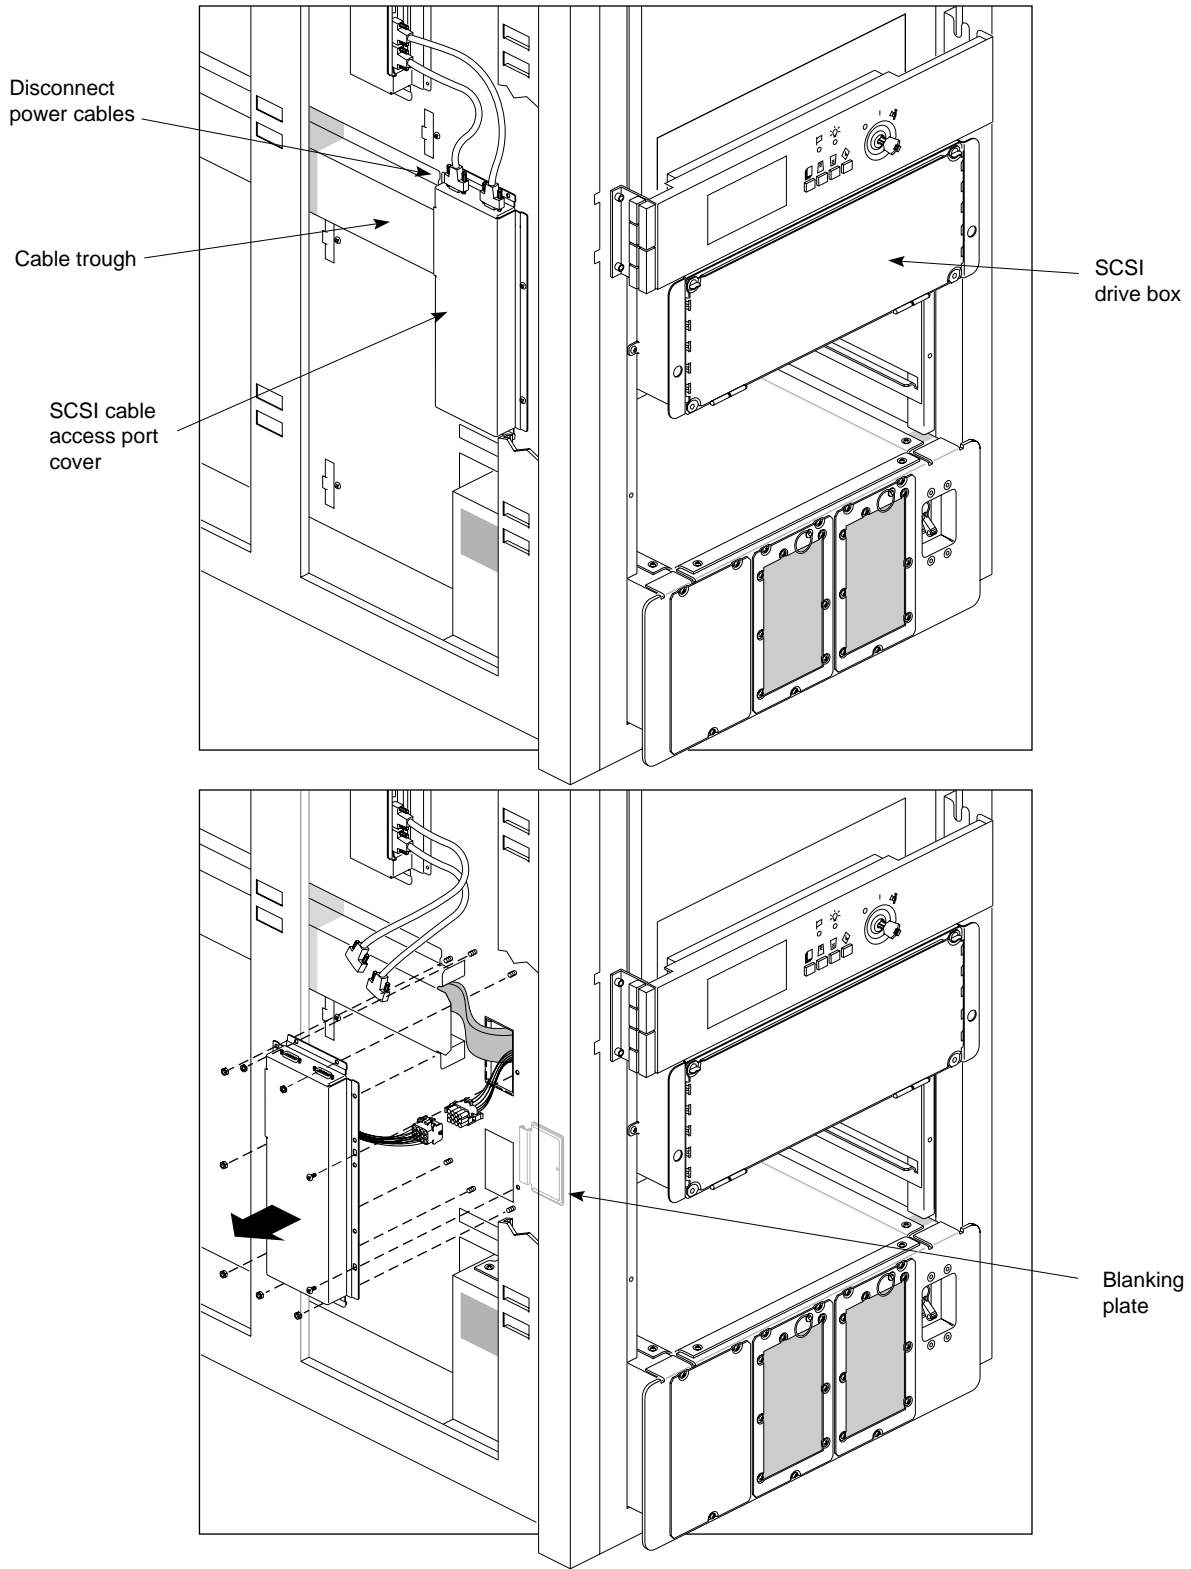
Removing the SCSI Cable Access Port Cover and Blanking Plate
